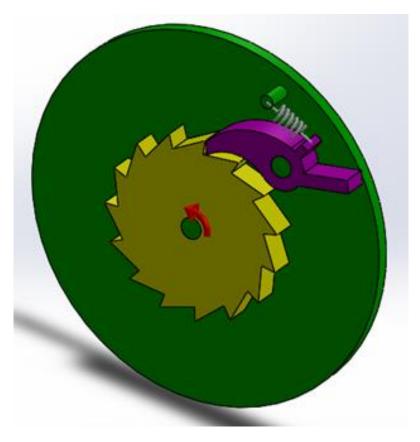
Ratchet and pawl with rotary motor and linear spring.
